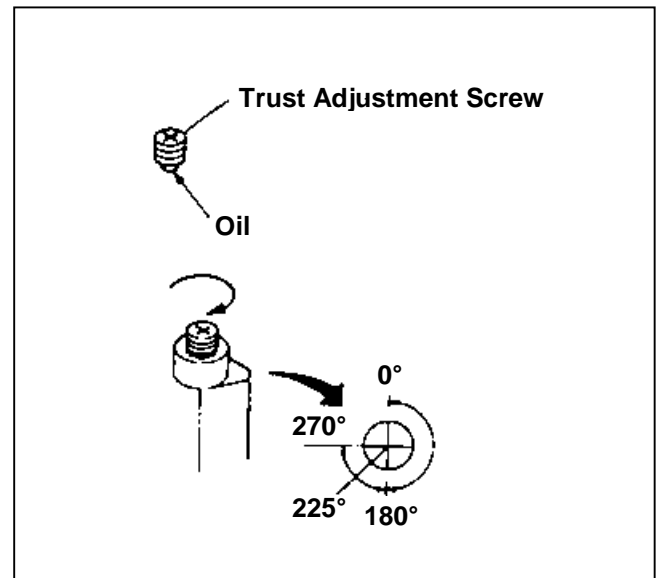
Adjustment of Thrust Adjustment Screw
